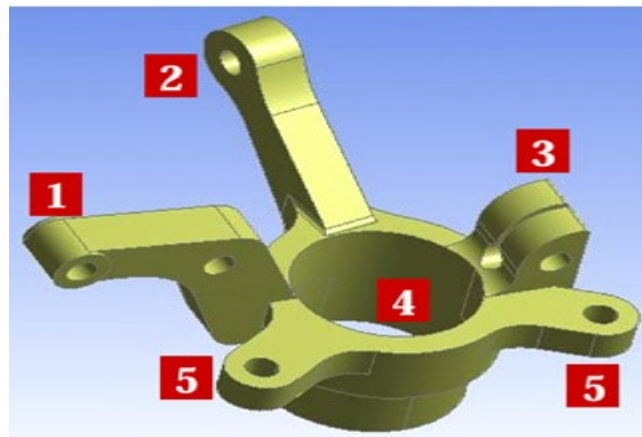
Components of a Steering Knuckle. (Yadav et al 2016)
